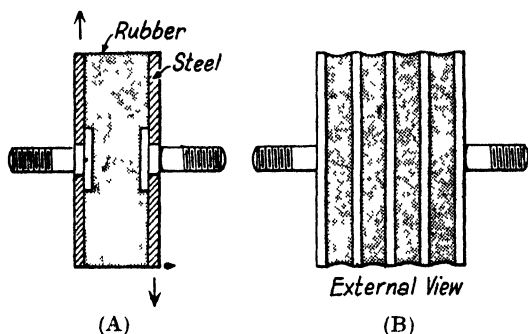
(A) SANDWICH MOUNTING. (B) MULTI-PLY TYPE MOUNTING
